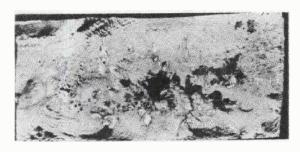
FRACTURE SURFACES OF WELDS WITH CLUSTERS OF POROSITY
